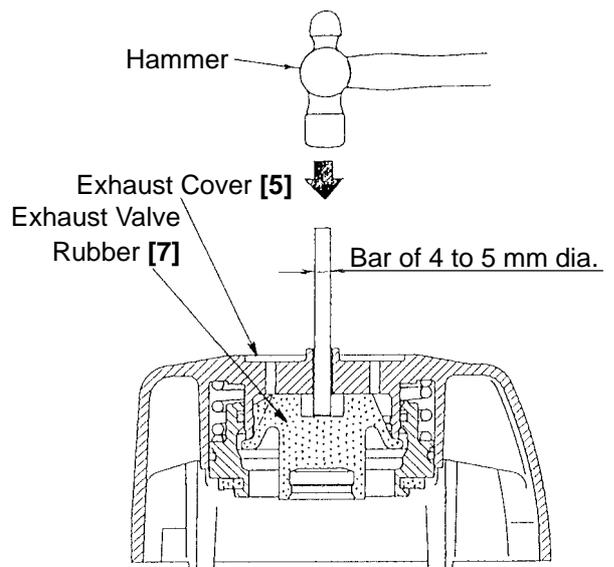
A Disassembly and reassembly of the exhaust cover, head valve, exhaust valve rubber, etc.
